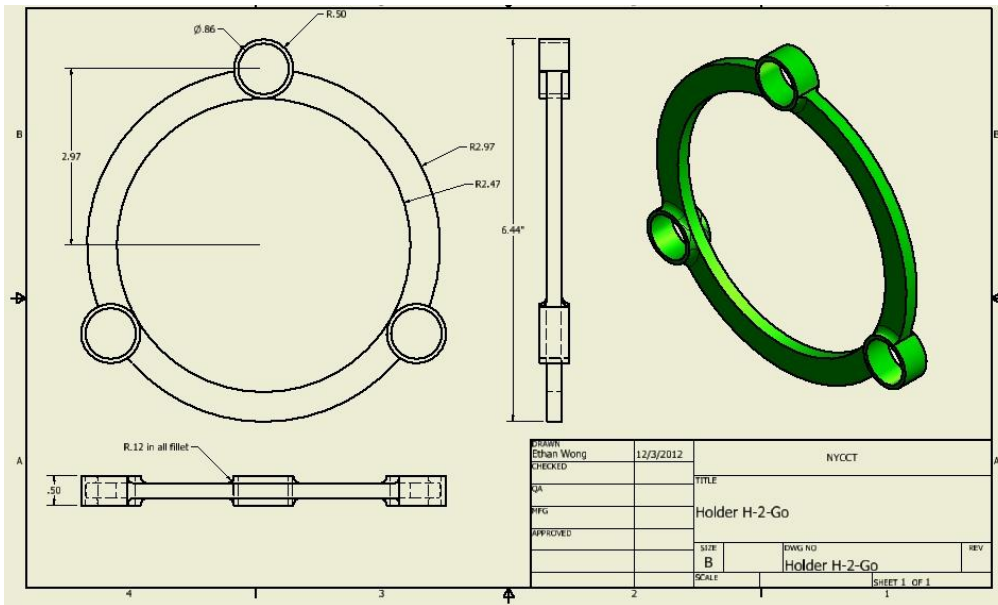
Structural Bracing for PVC columns. Used to prevent buckling.
